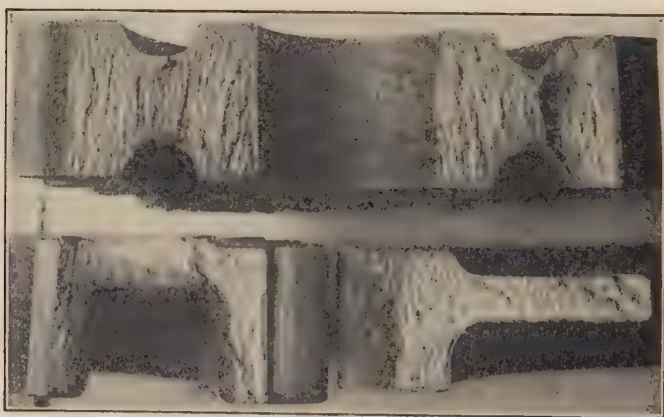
Purposely broken gears from chromium-nickel case-hardening steel: Top—straight fibers show that the gear was cut from a bar; bottom—bent fibers show the forged gear.
